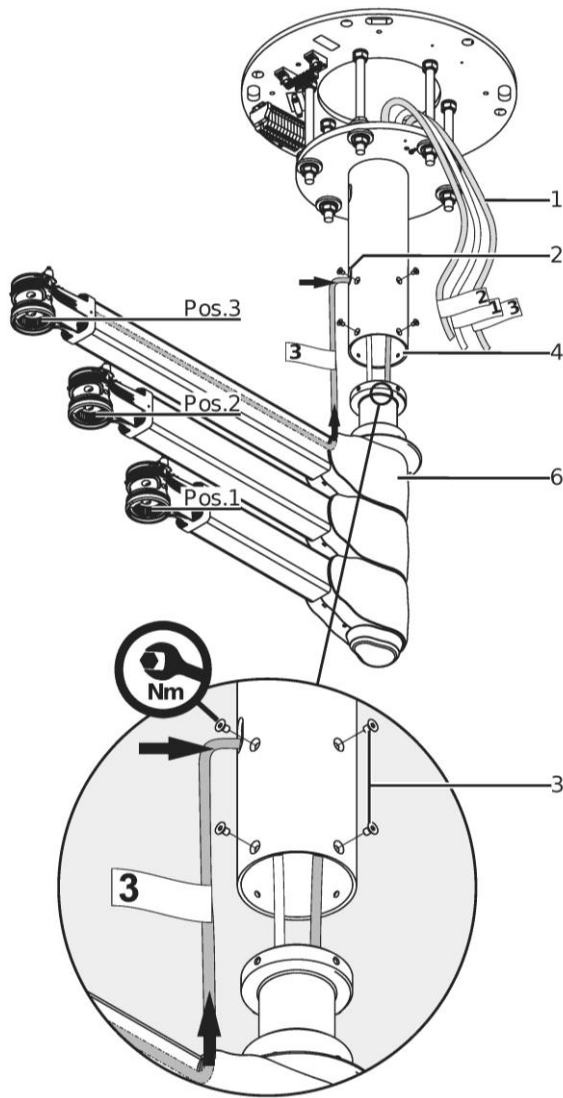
Mounting the Extension Arm set to the Ceiling Tube
